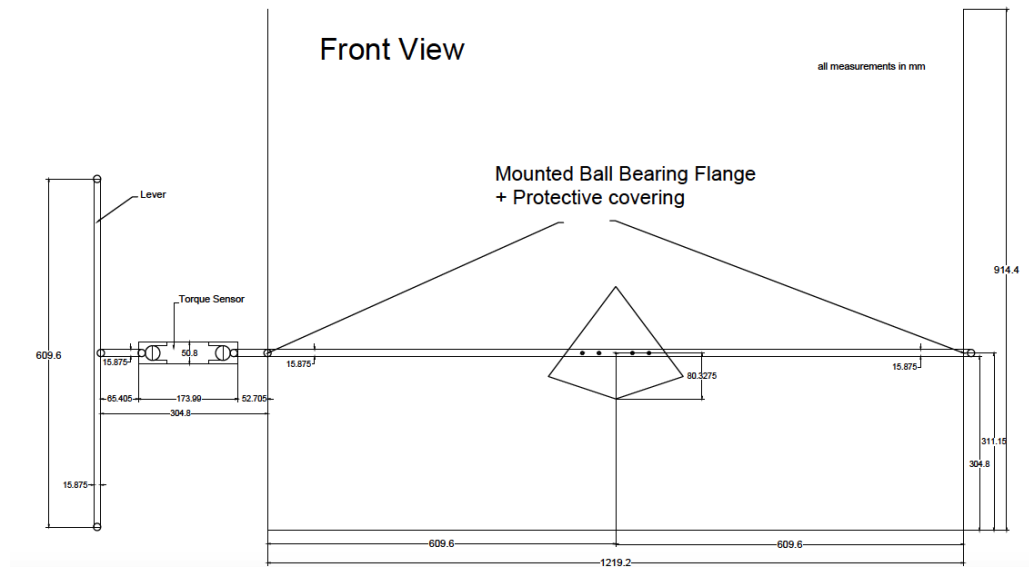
The front view test tank with dimensions for lever, anchor, and torque sensor for the pitch rotation (vertical fluke) tests.
